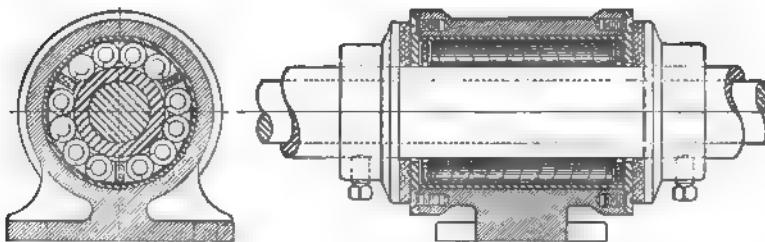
The "Hyatt" Flexible Roller Bearing, which consists of strips of steel rolled into coiled springs, forming a strong, though elastic, support, and capable of taking some end thrust.
